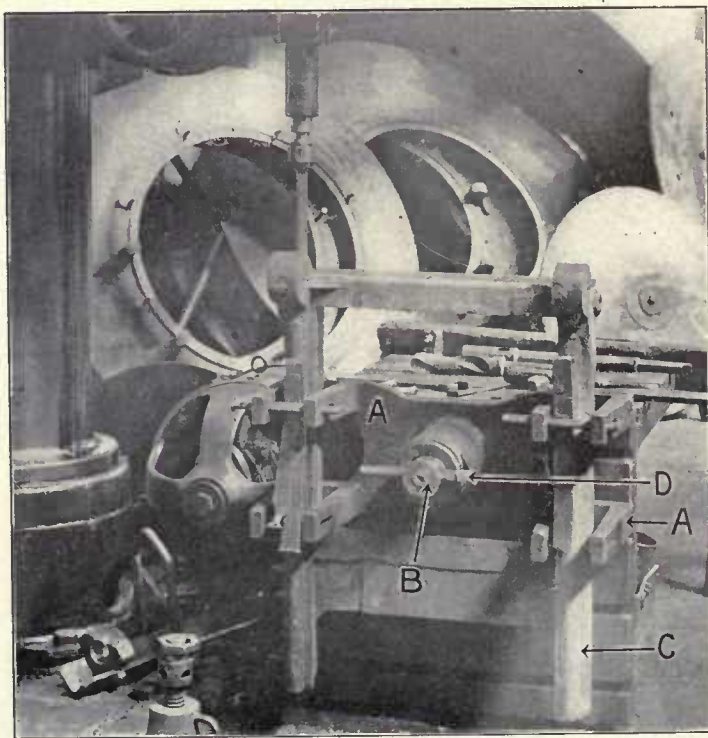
Clamp for Holding Ash Pan Casting on Drill Press.
